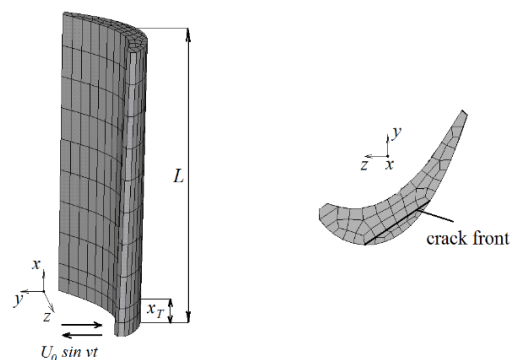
FE model of the blade airfoil with damage and cross-section of the airfoil with a crack
